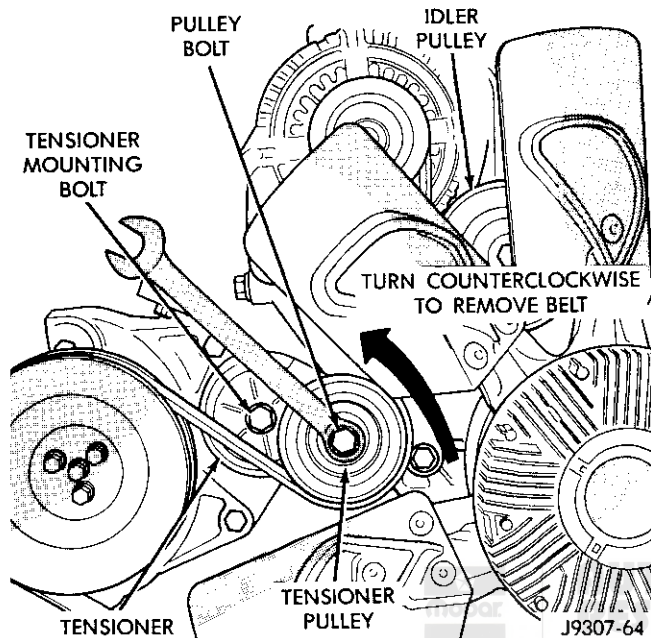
Belt Tensioner—5.9L HDC-Gas Engine
